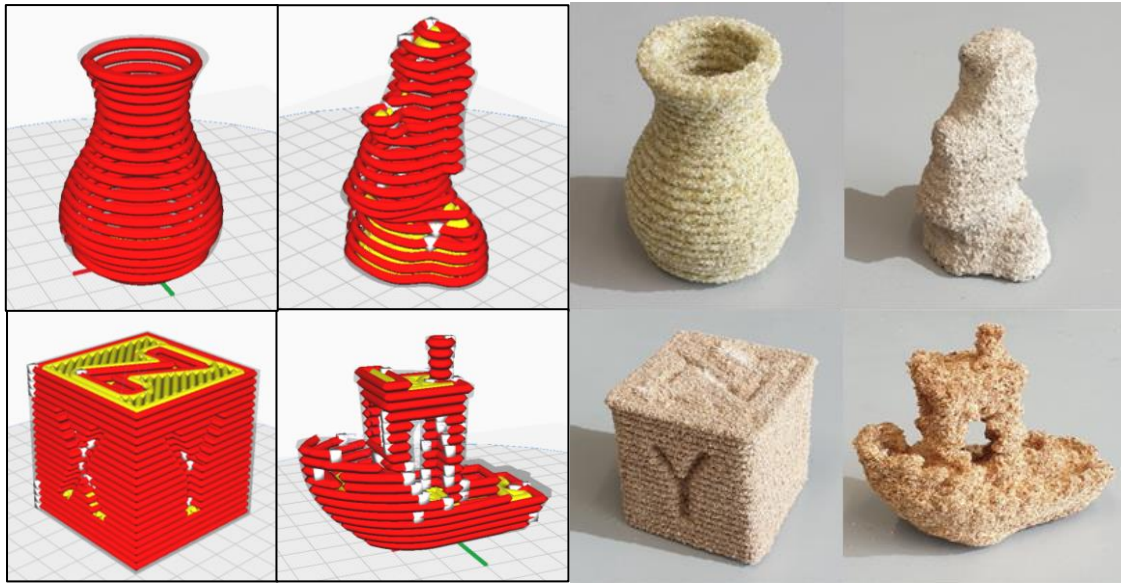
Example printed parts Left: Cura toolpath Previews. Right: Crushed glass/PVA vase, cement/sodium silicate moai, sand/PVA calibration cube and sawdust/pine resin 3D Benchy. For context, the printed parts are approximately 50-65mm high and print time was 20-30 minutes each.
